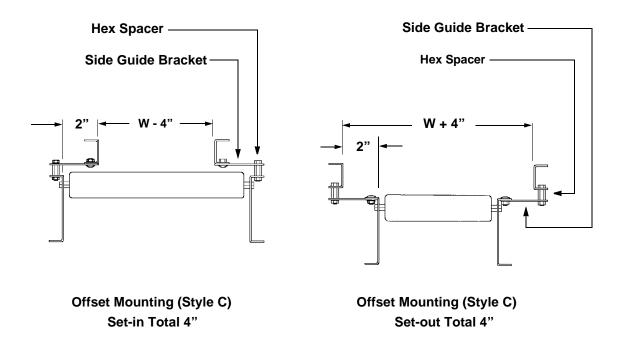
Offset Mounting (Style C), Set-in and Set-out (2 5/8" channel guide shown)
